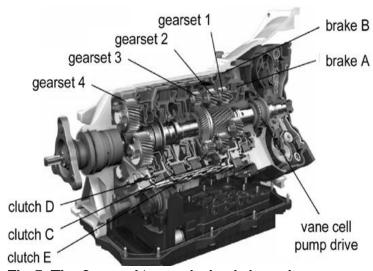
The 8-speed transmission is based on a gear set system with 5 shifting elements and 4 planetary gear sets; the overall gear spread is 7.05.
